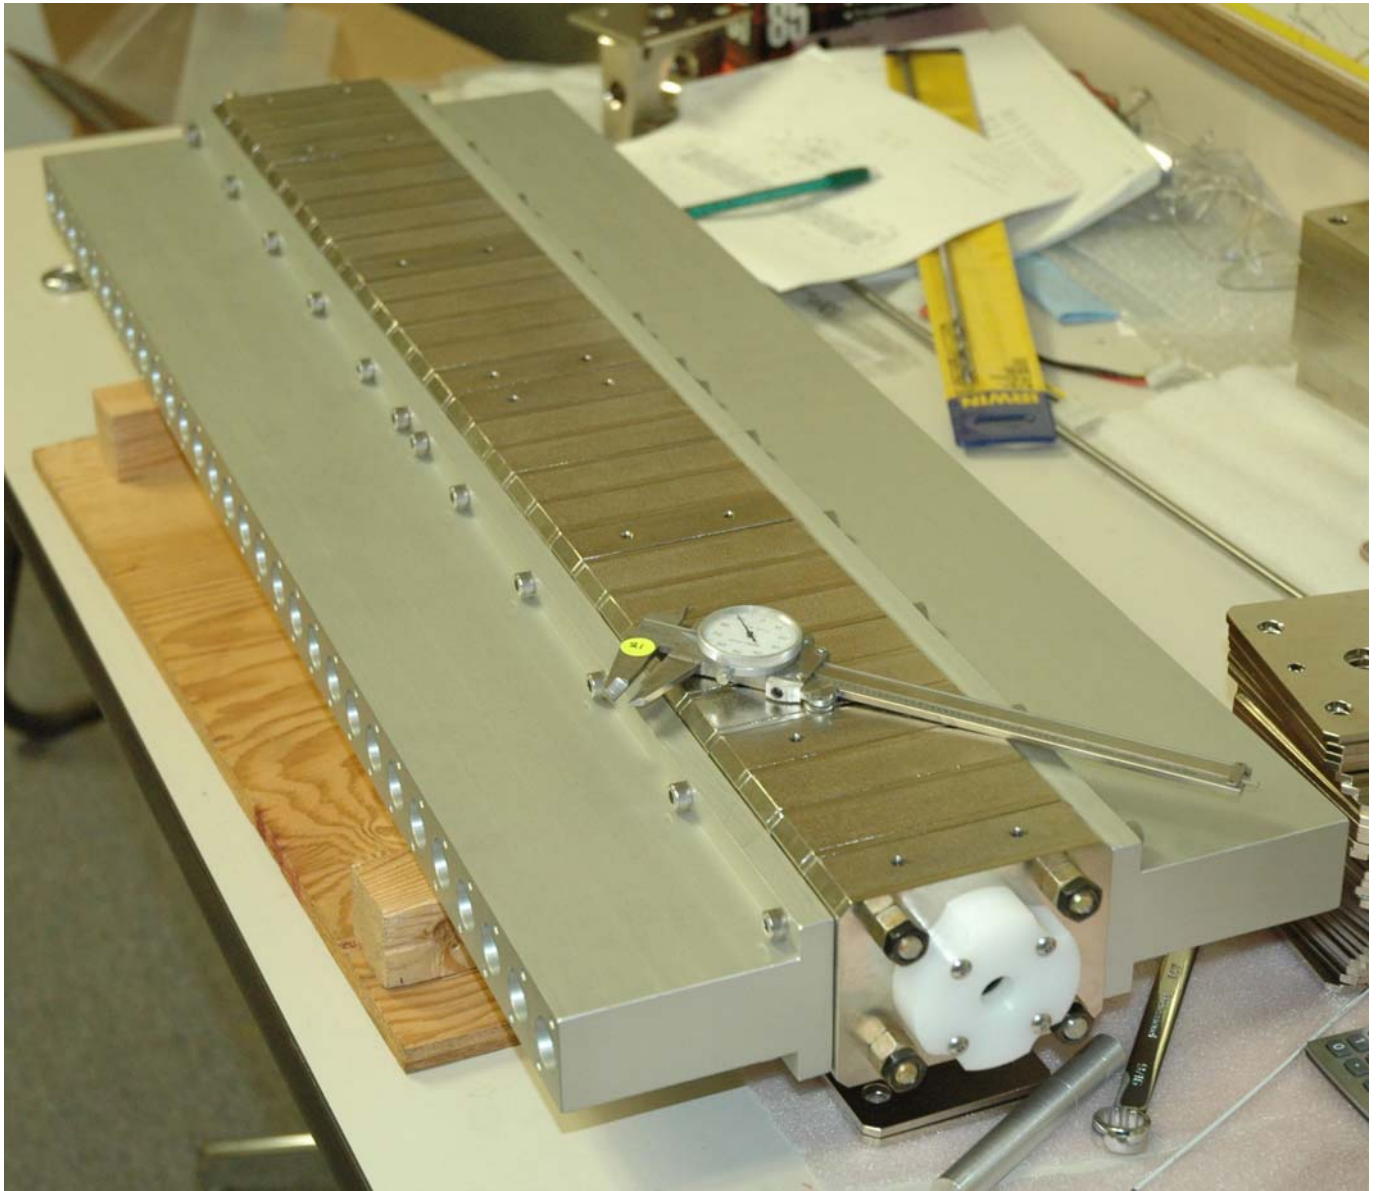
Passive gamma detector (30 BGO) assembly. Fuel rod passes through 30 donut like BGO detectors, each having a PM tube to either side. Four KV03 boards go to either side of the detector assembly in its shielded enclosure, connecting to the PM tubes in the detector assembly (not shown).
